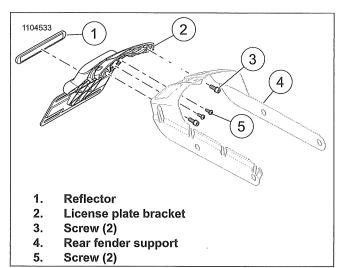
Center Mount License Plate Bracket DISASSEMBLE AND ASSEMBLE: CENTER MOUNT WITH LIGHTING
